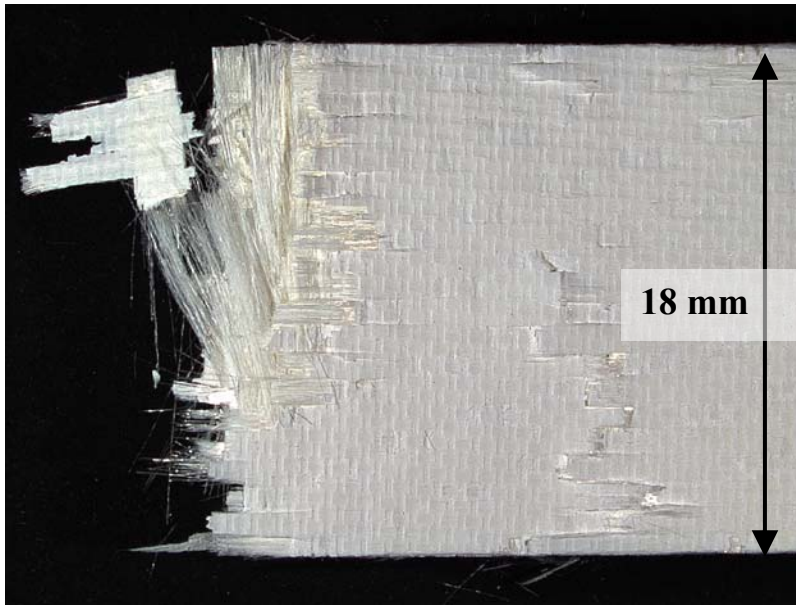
Fracture surface of N720/A specimen subjected to aging in steam at 1200°C for 25 h then failed in compression.
